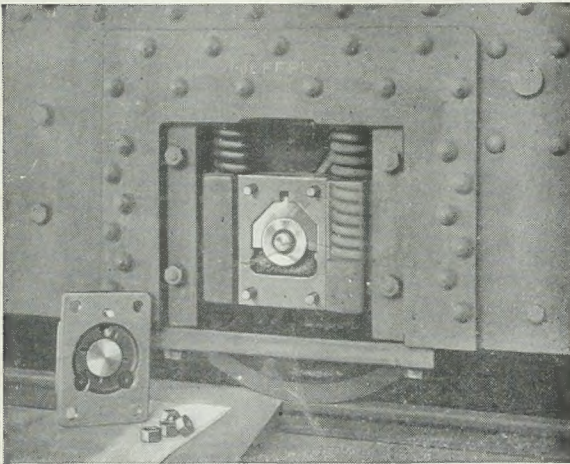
shows a journal box with the lid removed, exposing the end-thrust bearing
